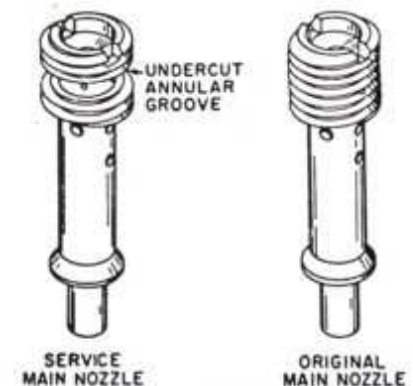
The main nozzle originally installed is drilled after installation through hole in body. Service main nozzles are grooved so alignment is not necessary.
